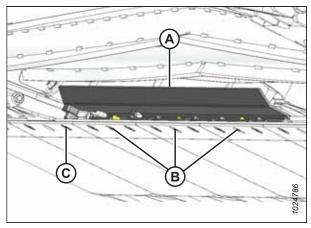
Left Cutterbar Deflector Viewed from Underside of Cutterbar
